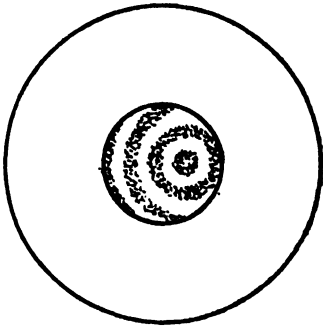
SHOWING MICRO-METER SPINDLE UNDER TEST AND HIGH SPOT
